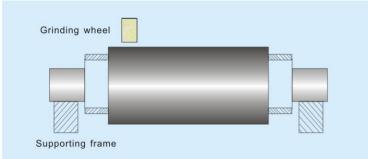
Fig. D: Finally, grind the roll neck surface, the dimension should conform to The tolerance requirements concentricity of outer diameter between Roller neck and the two bearing inner rings should comply with tolerance requirements.
